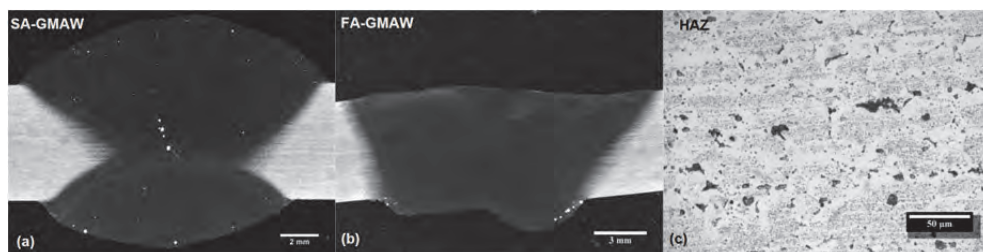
Representative of 5083-H111 welds: (a) SA-GMAW weld; (b) FA-GMAW weld; and (c) HAZ.
